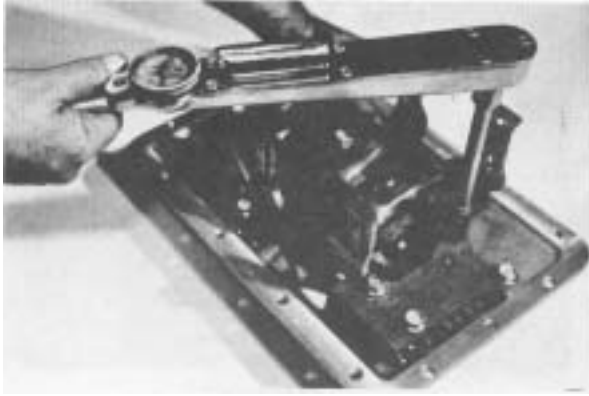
Tighten front and rear support cap screws 20 to 25 ft. lbs. torque [27,2 - 33,8 N,m]. Tap 4th & 5th shift fork and rail assembly forward to a neutral position.
